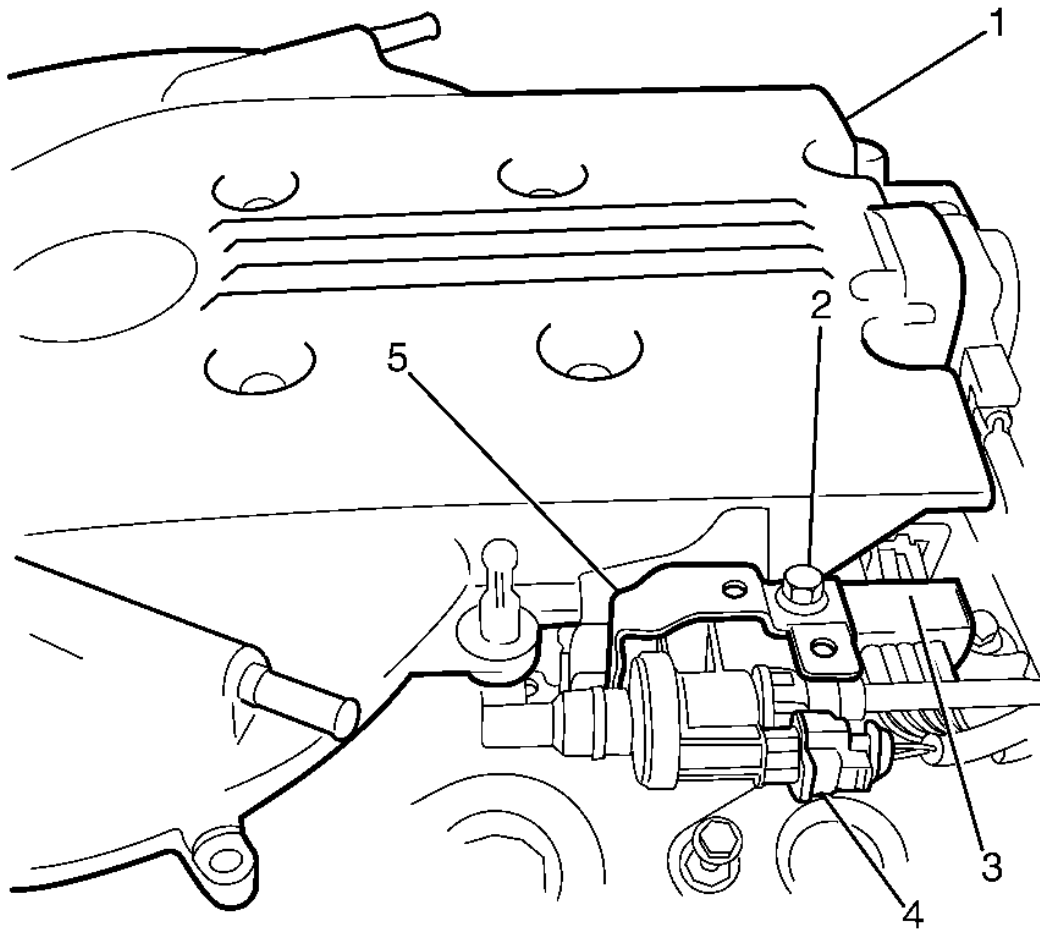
View Of EVAP Hose & Upper Intake Manifold
